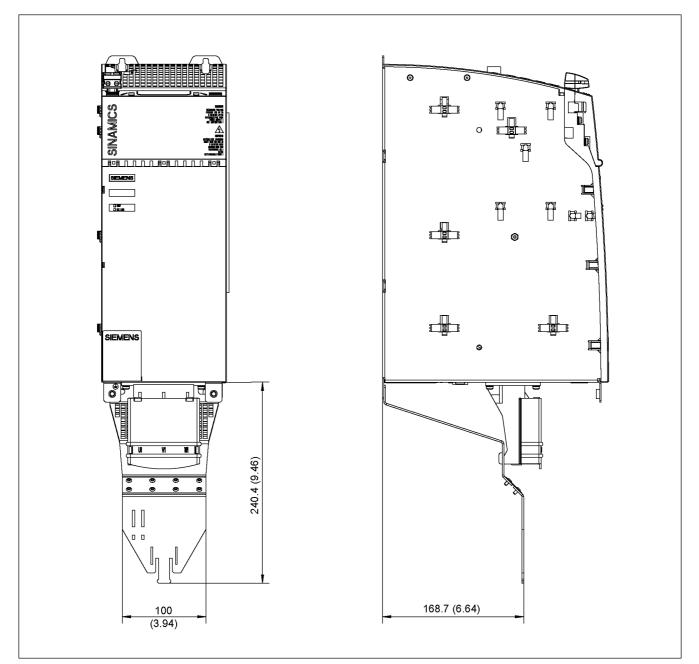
Dimension drawing of shielded terminal plate on a 150 mm module with internal air cooling
